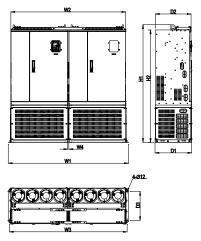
Parallel mounting diagram for 380V 560-630kW and 660V 710kW
